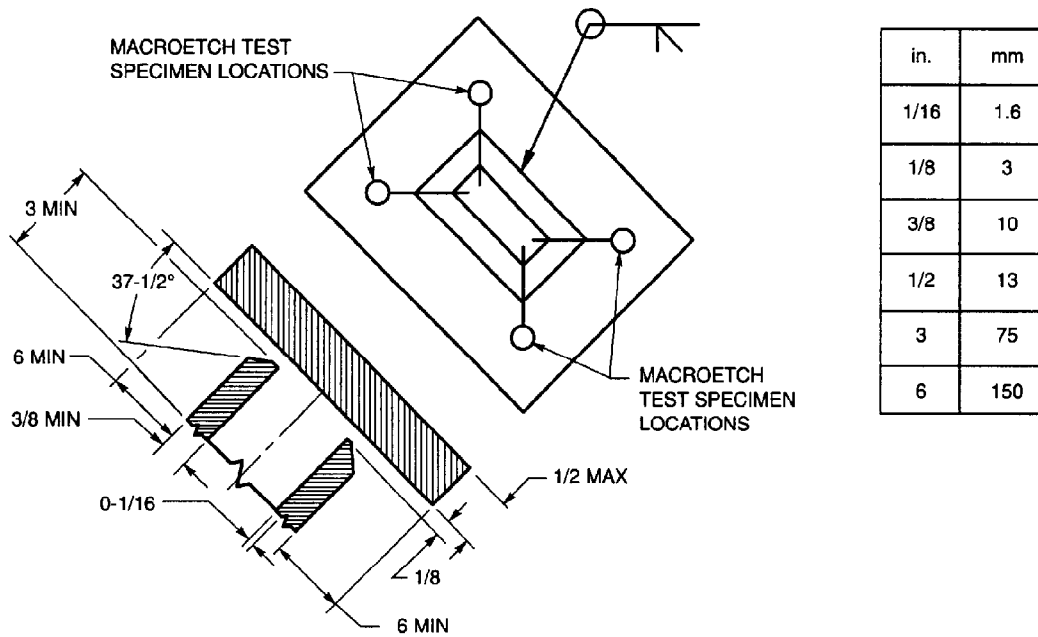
Corner Macroetch Test Joint for T-, Y-, and K-Connections without Backing on Box Tubing for Complete Joint Penetration—Welder and WPS Qualification (see 4.12.4.1 and 4.26)
